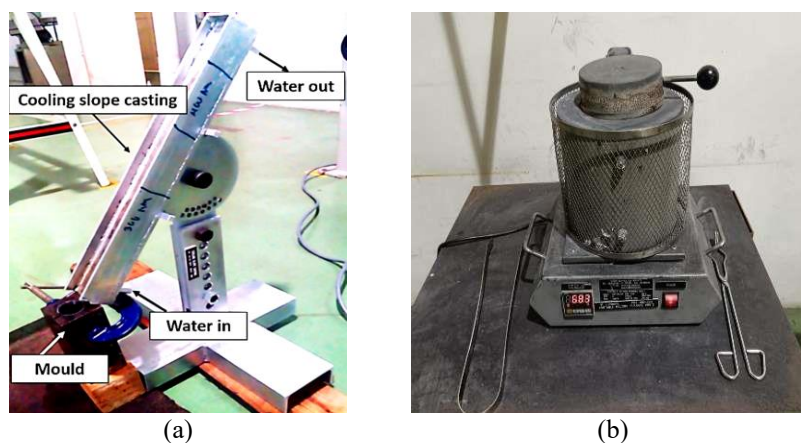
Cooling slope casting apparatus (a) Cooling slope (CS) with D2 tool steel mold; (b) Portable melting furnace
